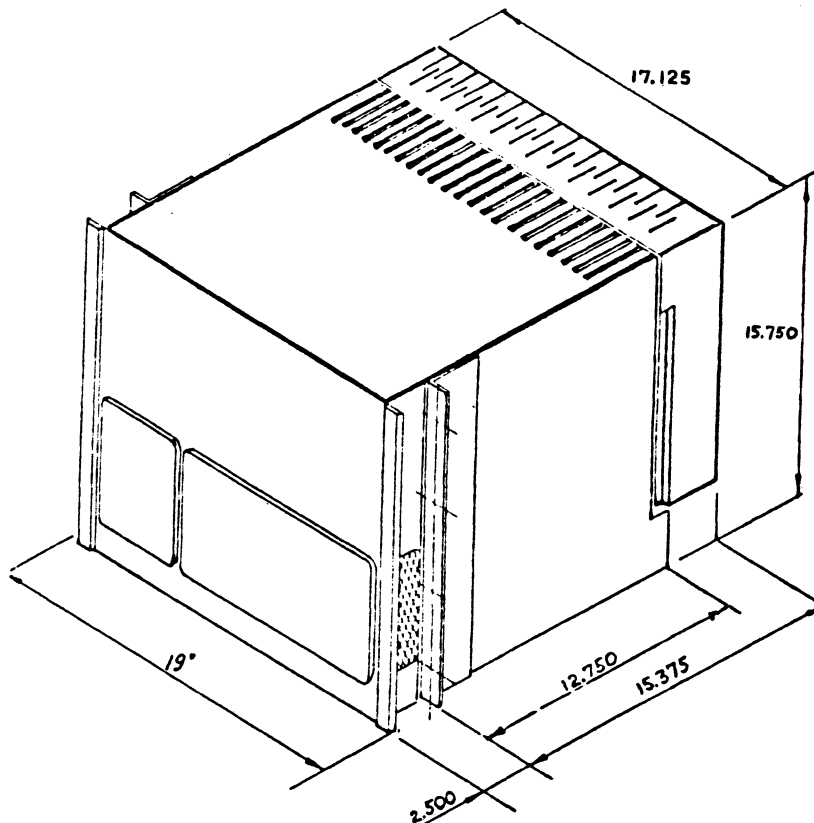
General View and Dimensions of Main Enclosure: Type Identifier A
